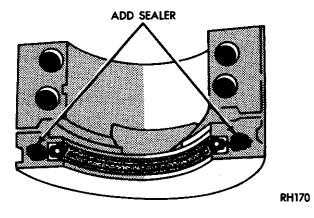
Rear Main Bearing Cap (5.9L Engine)
